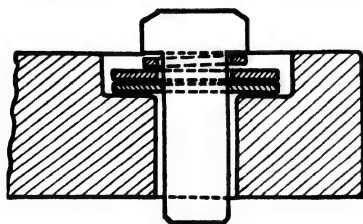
How the bolt and washers go together in the countersunk holes.
